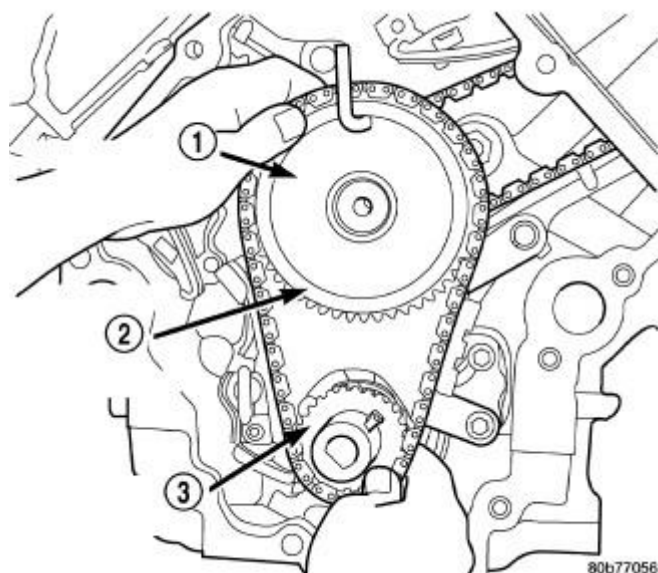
Installing Idler Gear, Primary and Secondary Timing Chains
